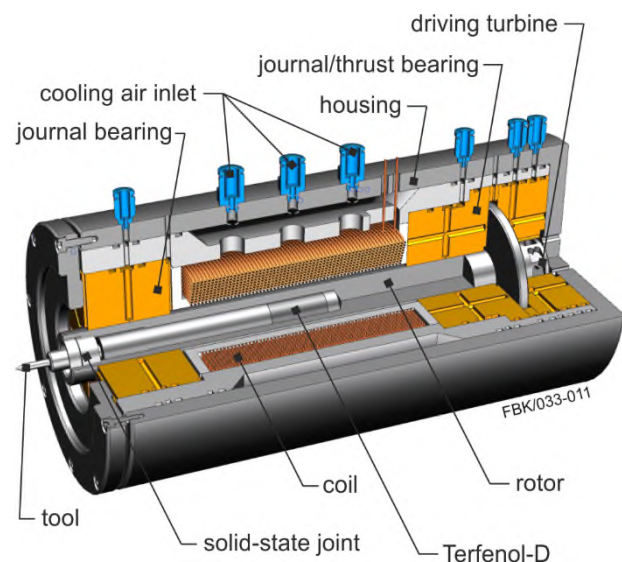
Sectional view of the vibration-assisted air bearing spindle
